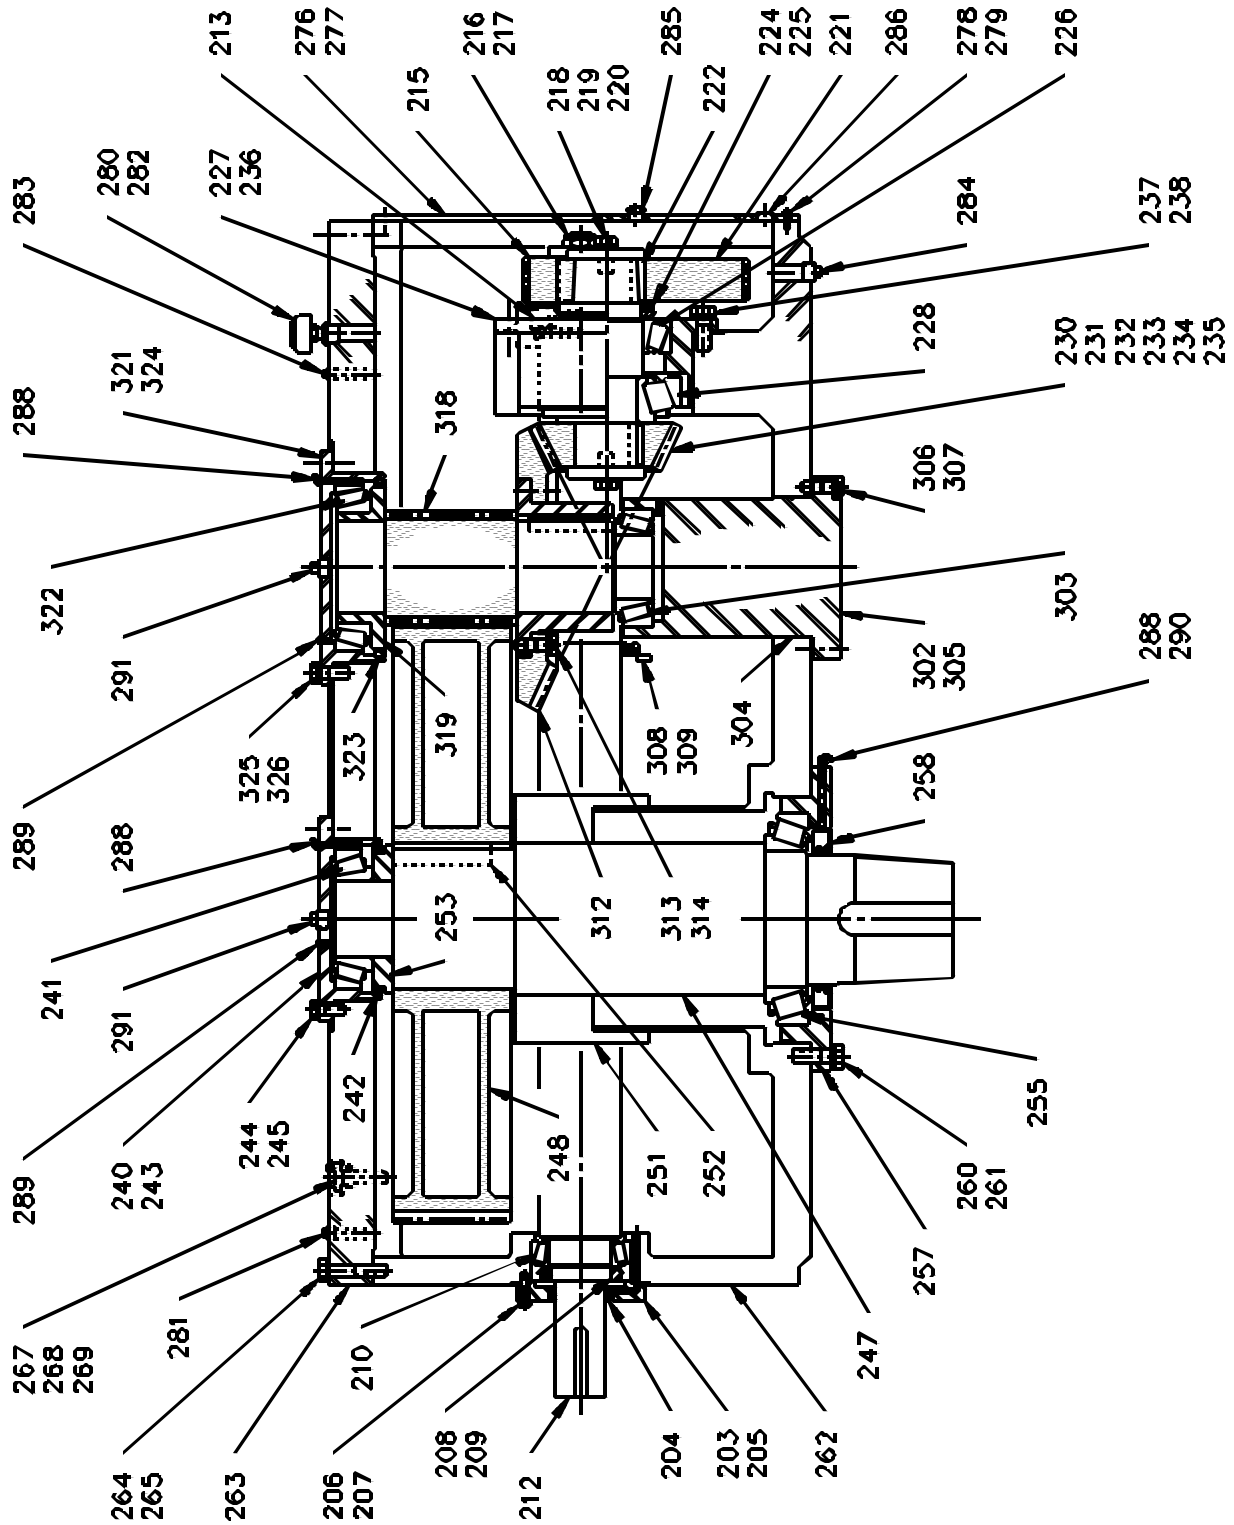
HT Gear Drive: Case Sizes 11,12,13
